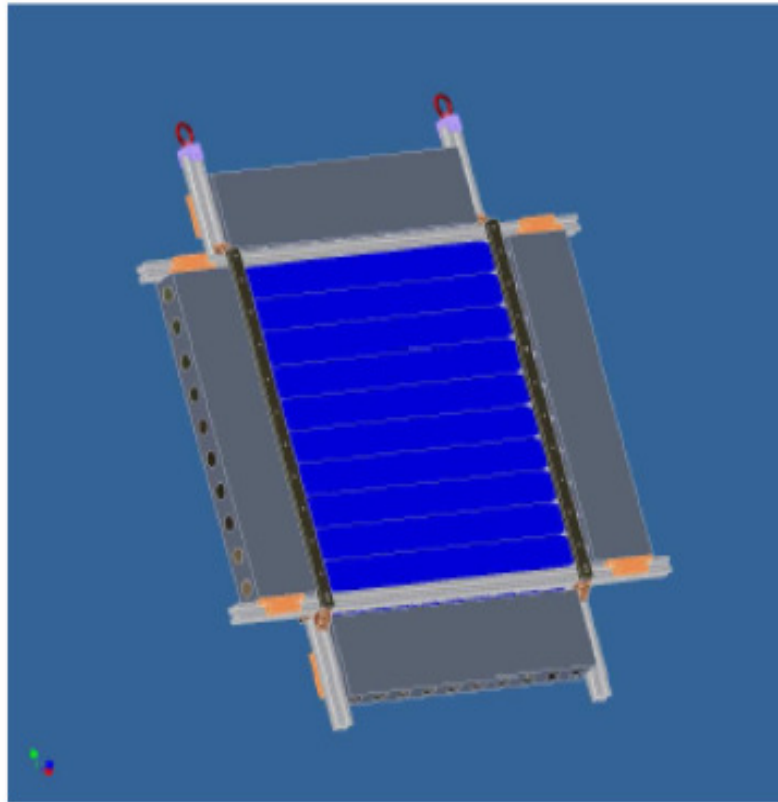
CAD drawing of TOF2 with local shieldings for PMTs, using a single bar of ARMCO 6 cm thickness for each side.
